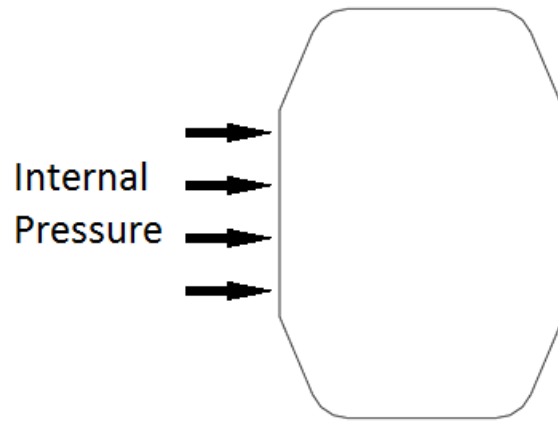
The surface where the internal pressure is applied on the ring gasket part.
